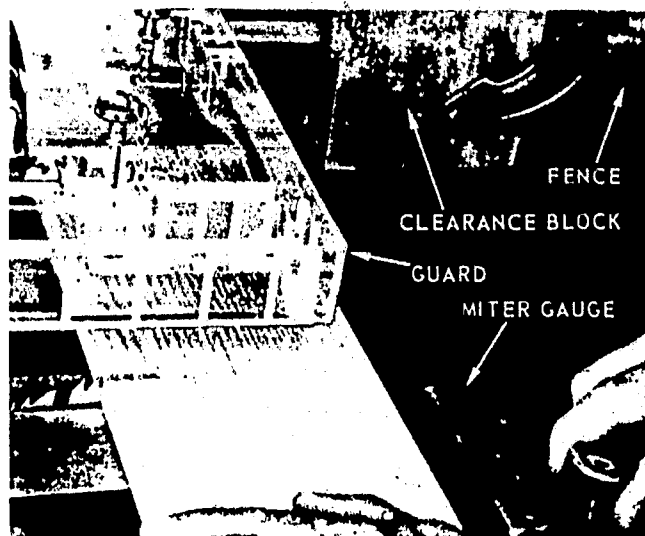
Crosscutting duplicate pieces using a circular saw and clearance block.
